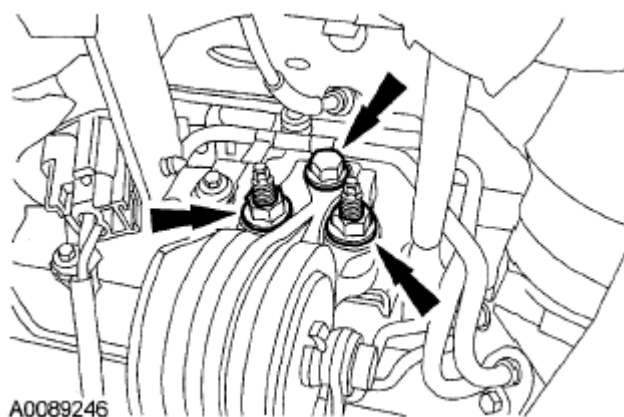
Locating Bolt, Nuts And RH Transaxle Support Insulator
